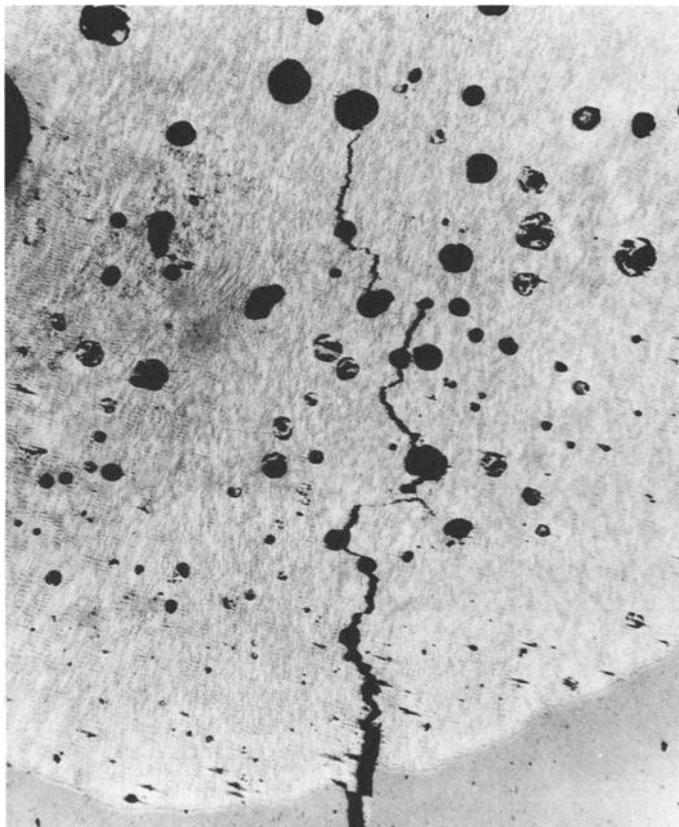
Details of crack tip at the root of embrittled and porous aluminum weld in beryllium fracture Specimen 617-3 showing unfractured ligaments between pores (as polished, $\times 100$).
